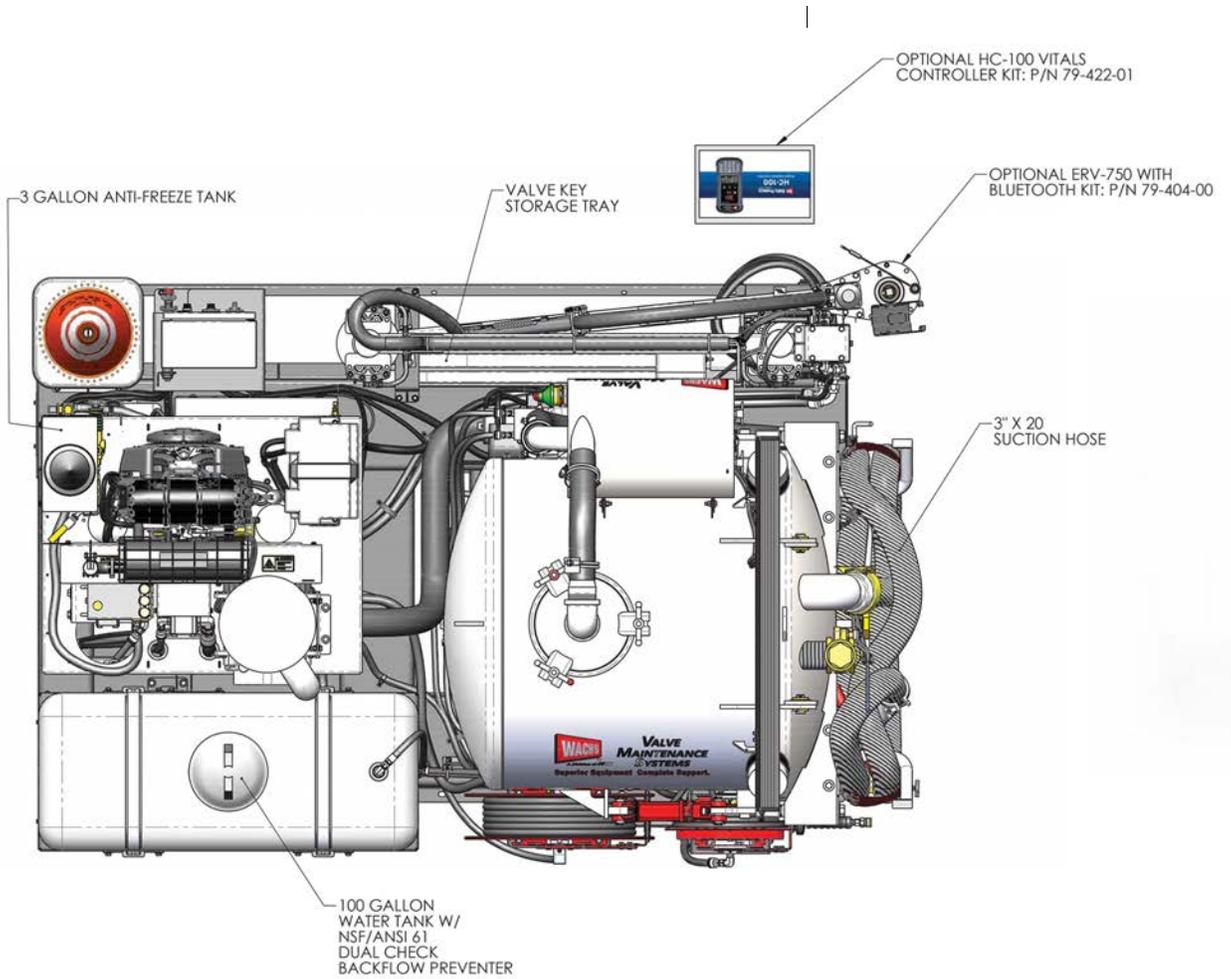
The drawing shows the top view of the Standard Builder gas engine configuration, 77-000-61.
